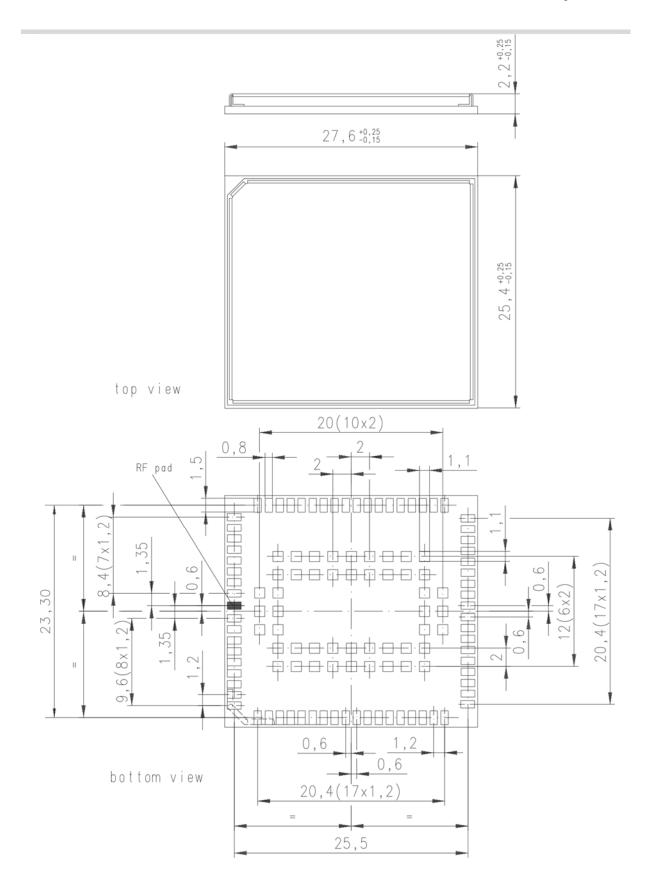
Dimensions of EHS6-A (all dimensions in mm)
